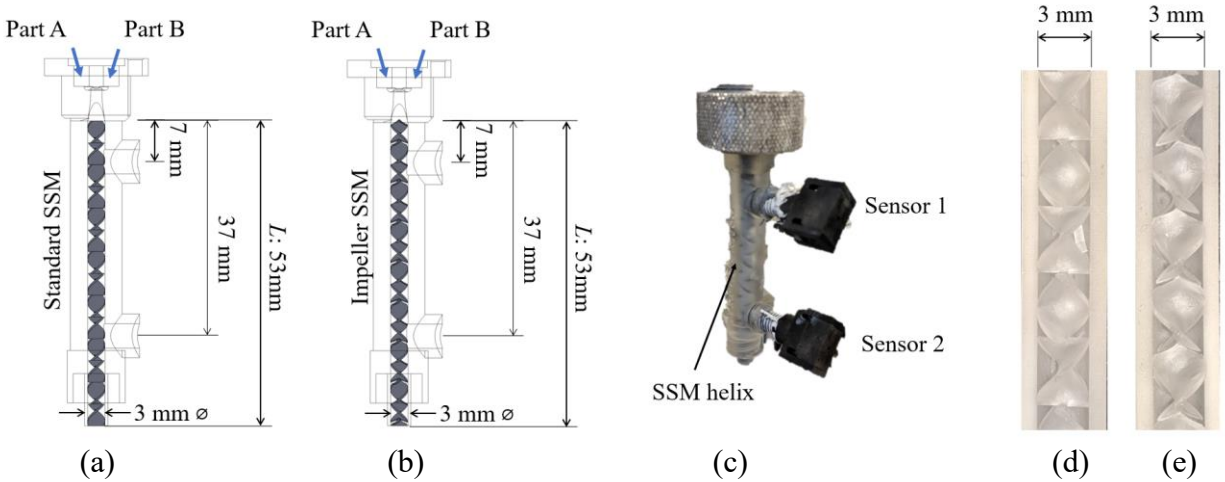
(a) The standard SSM and (b) 22.5-22.5-22.5 Impeller SSM with the location of the pressure ports and overall length annotated, (c) the standard SSM produced using SLA and with pressure sensors installed, and cutaway view of the (d) standard SSM and (e) 22.5-22.5-22.5 Impeller SSM produced using SLA.
